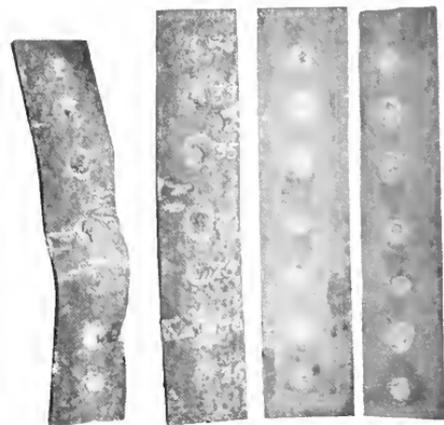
Samples of Welds performed on Duplex Welder
